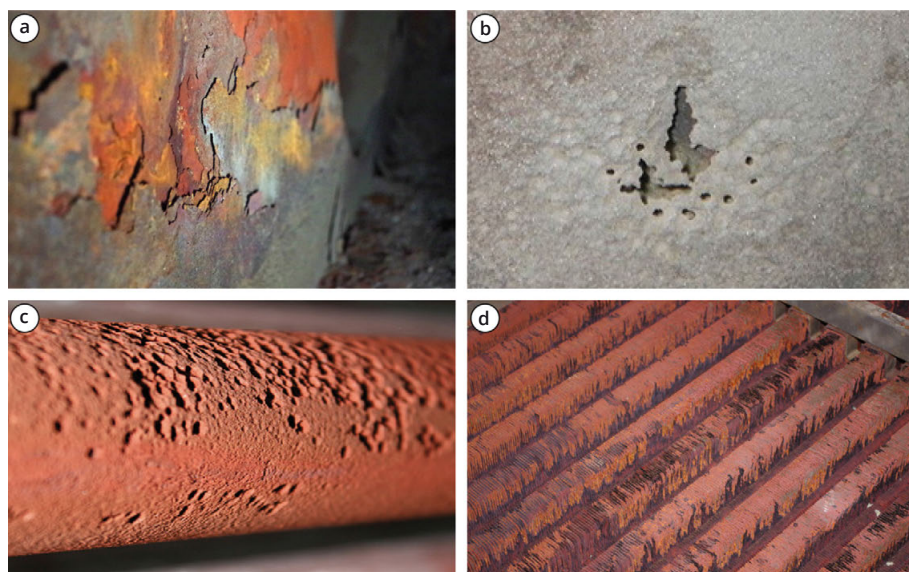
Examples of corrosively damaged components in the flue gas system after the boiler. (a) Sheet-like corrosion layers with embedded salts on a sheet metal wall. (b) Pitting corrosion on a sheet metal triggered by localized cooling via an externally welded T-beam. (c) Pits caused by aqueous electrolytes after deliquescent corrosion on a heat exchanger tube. (d) Corrosion on a finned tube heat exchanger upstream of the stack.
